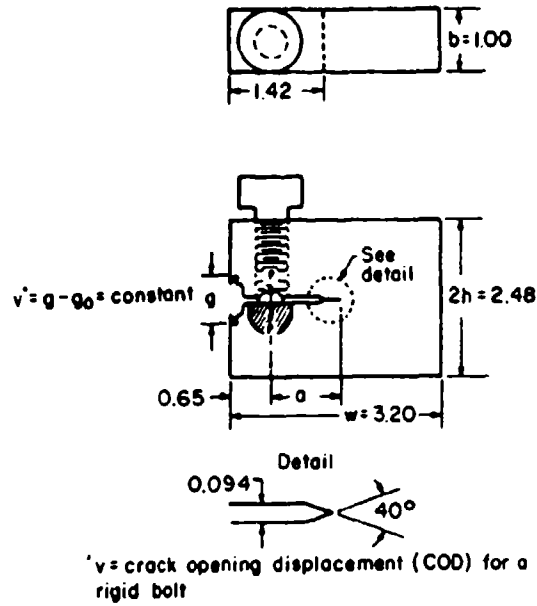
Modified 1-T WOL (BWOL) Specimen Used to Determine K_{Isc} by Bolt Loading.
